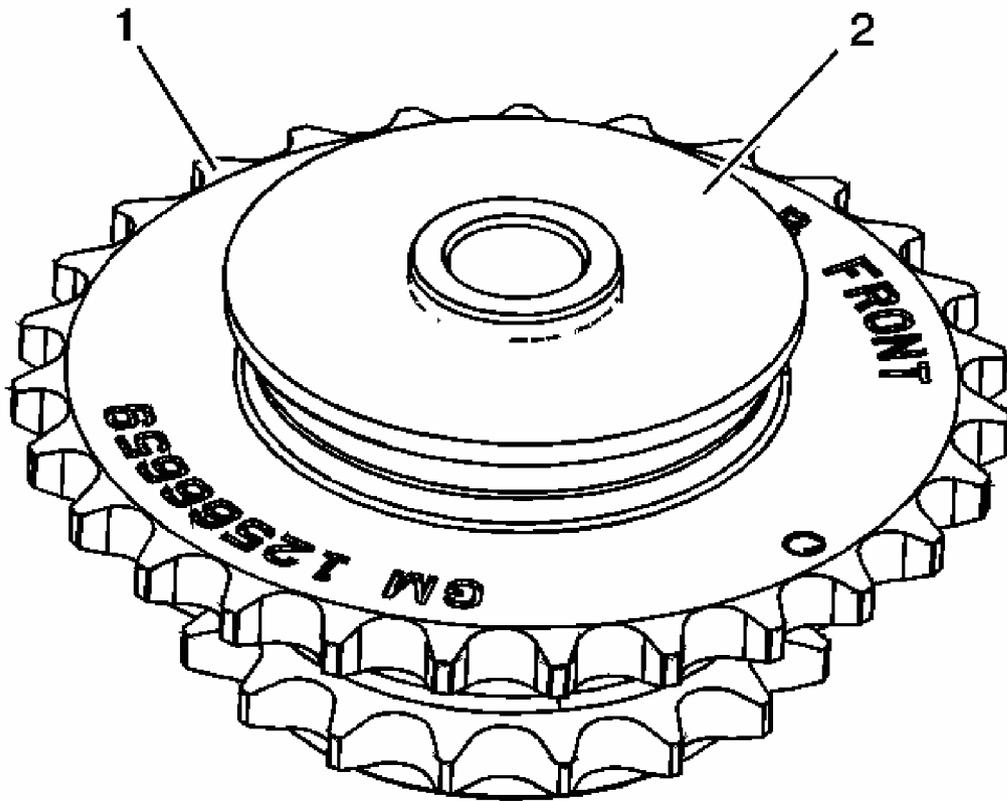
Inspecting Back Of Right Intermediate Sprocket
